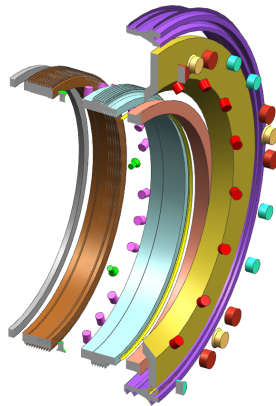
IPT Stub Shaft Design Features. Coloured names represent the stub shaft features - HP3 Air Seal Fins, Flange Holes, Taper Bolt Holes, Dowel Holes, R030 Holes, Mating Face, Seal Ring Mating Face, Air/Air Lab Seal, Rivet Holes, R044 Holes, Oil/Air Lab Seal, Weld Joint.
